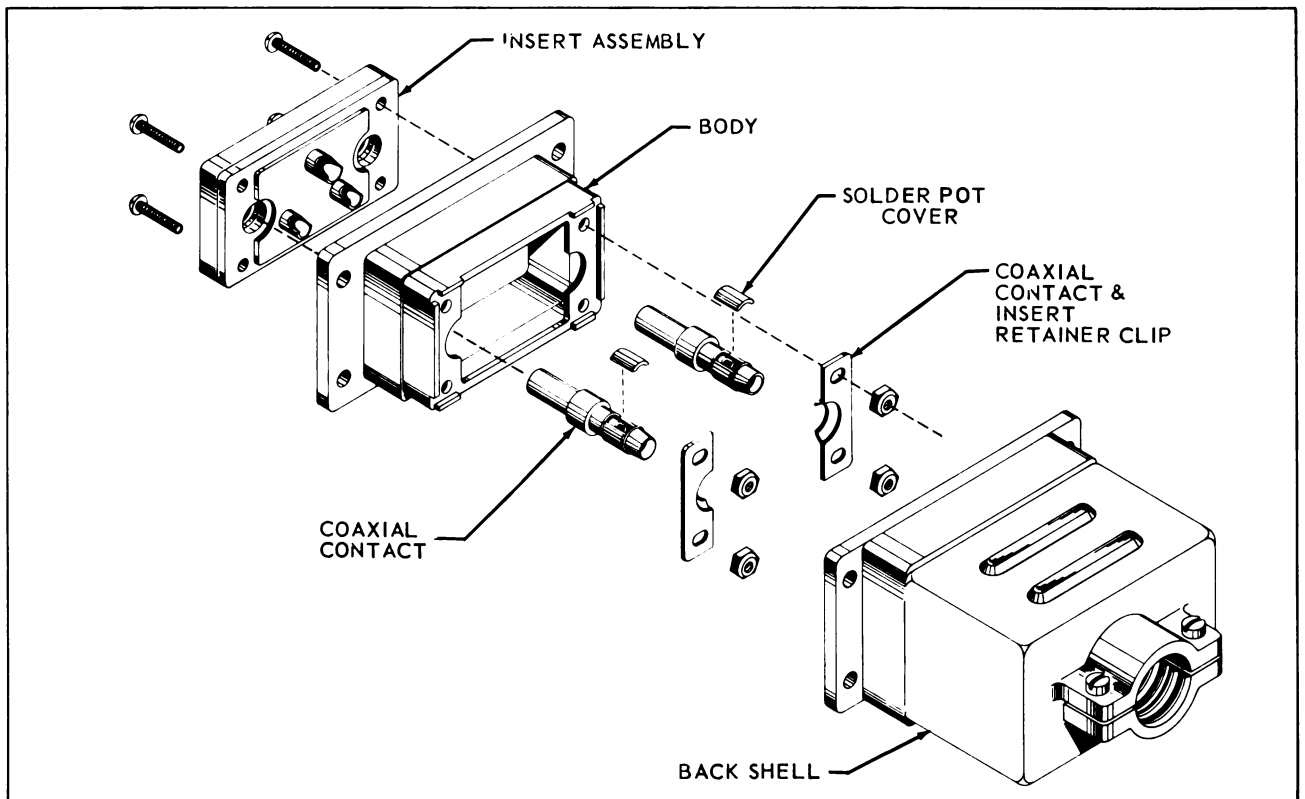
Rectangular Shell Connector - Cannon DPD - Exploded View
